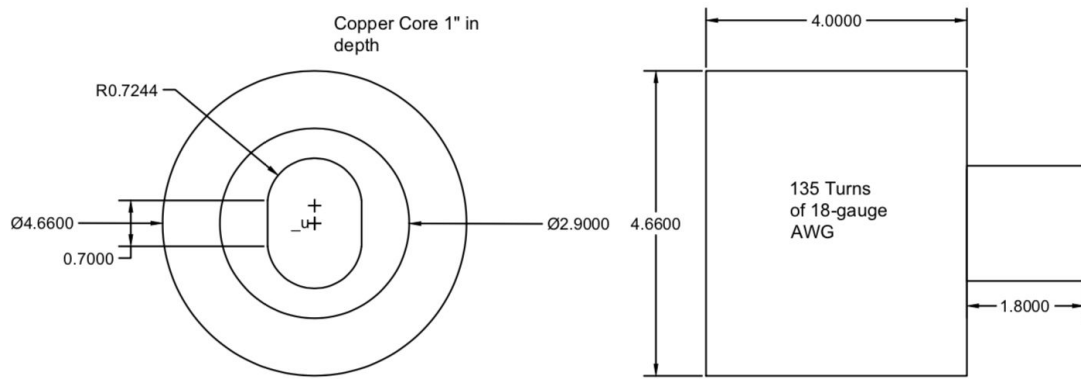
Mechanical drawing of magnet (all dimensions in inches)
